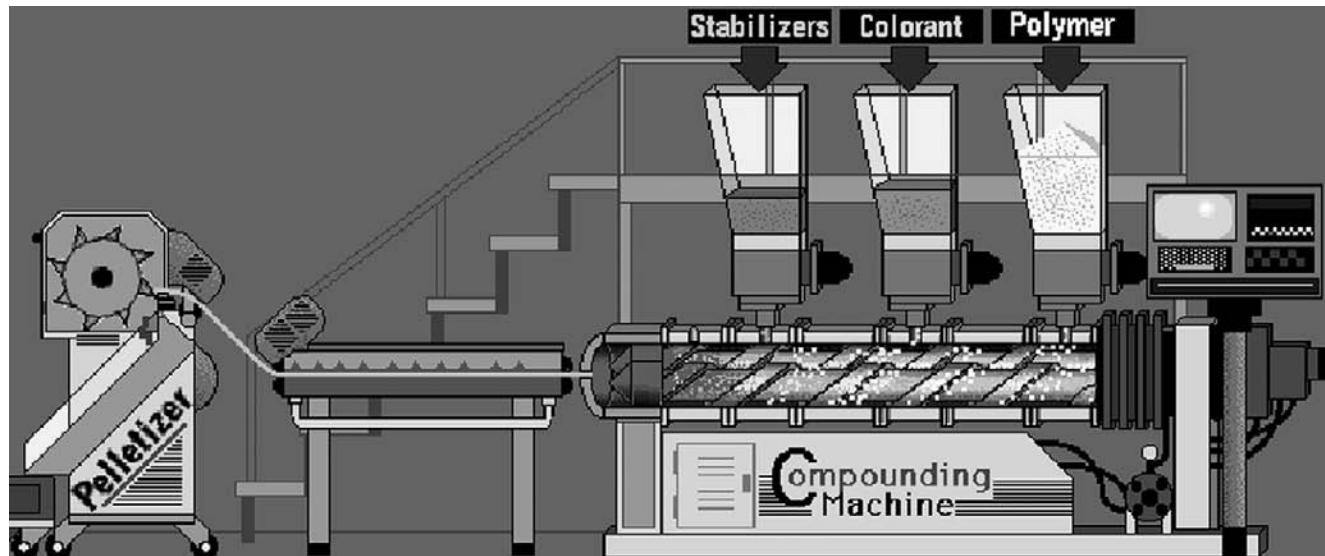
Twin screw extrusion line (Pennsylvania College of Technology).
